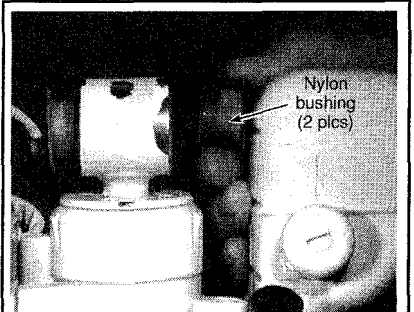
Install two nylon bushings in the end of the tilt cylinder and the end of cylinder body.
